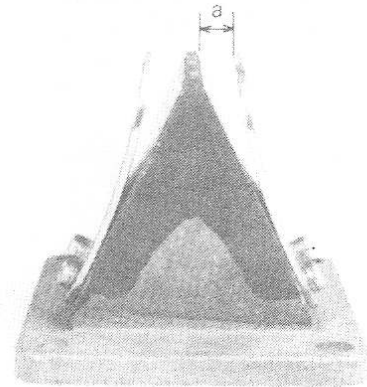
A.8 Check the stopper plate-to-reed block clearance (a) to see if it is correct (don't make it larger by bending the stopper) (Sec 10)
